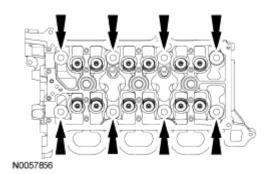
Locating Cylinder Head Bolts Courtesy of FORD MOTOR CO.
